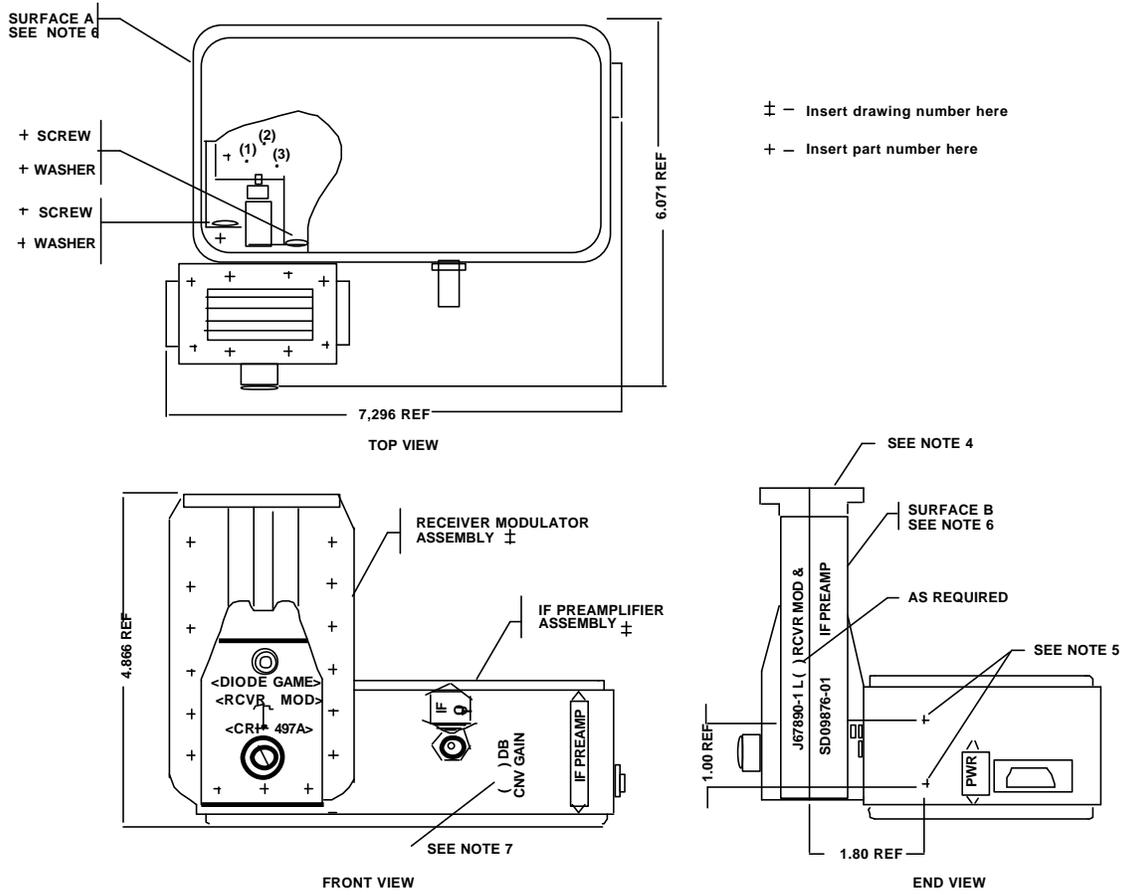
N Equipment Assembly, Chassis Unit-Main View (With Stocklist)
